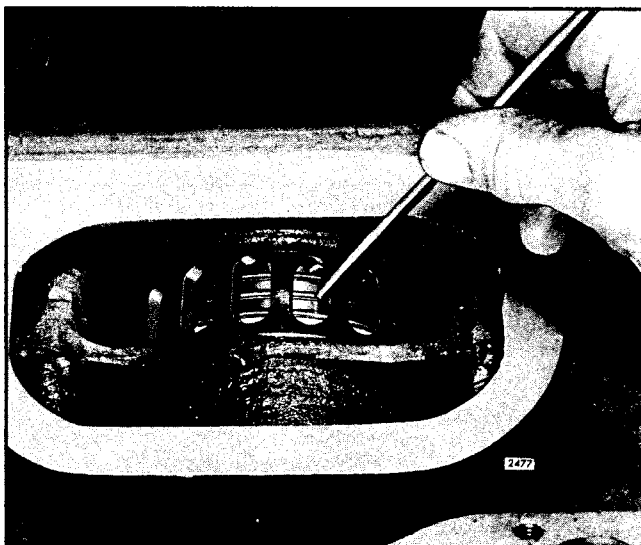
Inspecting for Broken Piston Rings Through Cylinder Liner Air Ports
